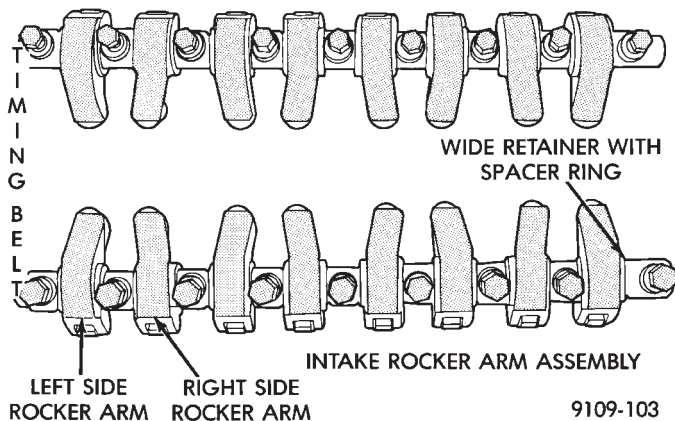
Intake and Exhaust Rocker Arm Assemblies
